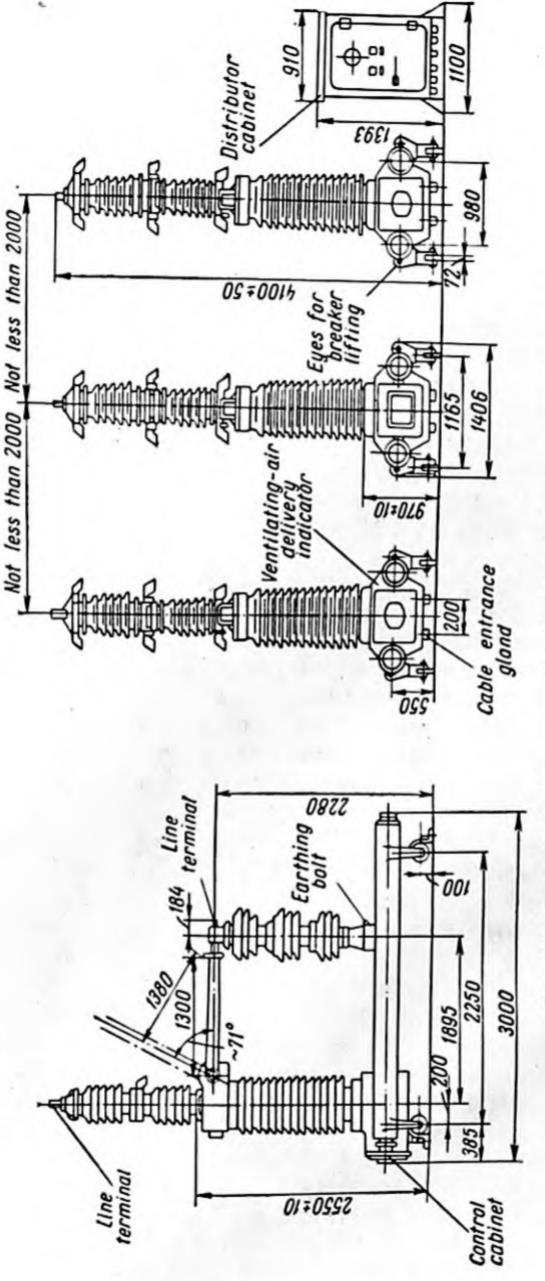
Installation drawing of a BBH-110 air-blast circuit breaker
